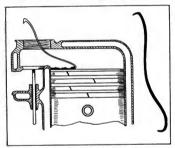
Depicting How Carbon May Be Removed from Cylinder with Home Made Scraper.
